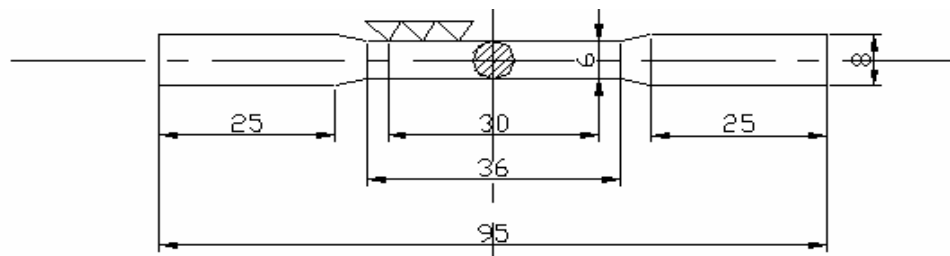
Dimensions of tensile test specimen according to DIN 50125 [54]
